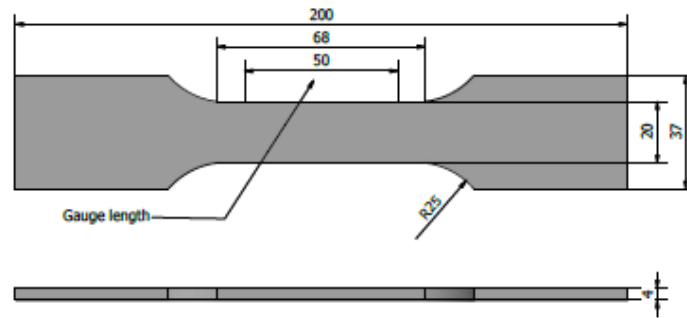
Tensile test specimen geometry for large size samples (LS series)
